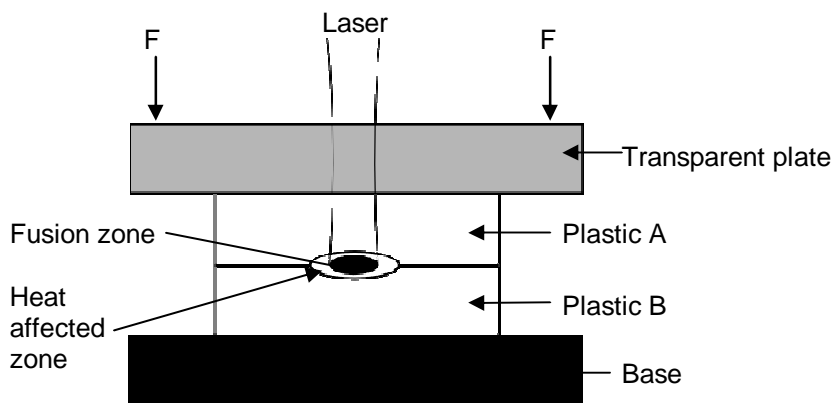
Principle of laser welding, re-drawn from [26]
